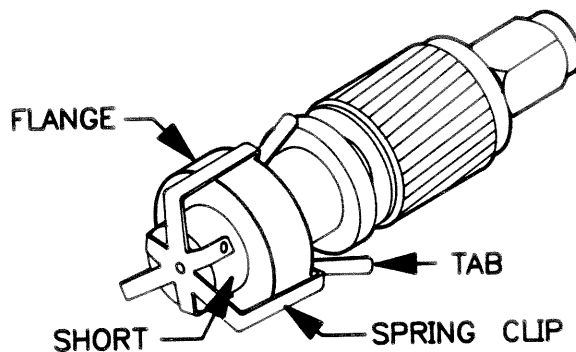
Short Circuit Held on Probe by Spring Clip
